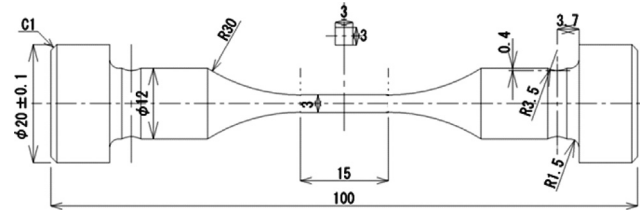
Axial fatigue specimen of Ti-6Al-4V for cyclic delamination test of HAp coating. 3 × 3 mm² HAp coating is deposited at the center of testing section 15 mm.
